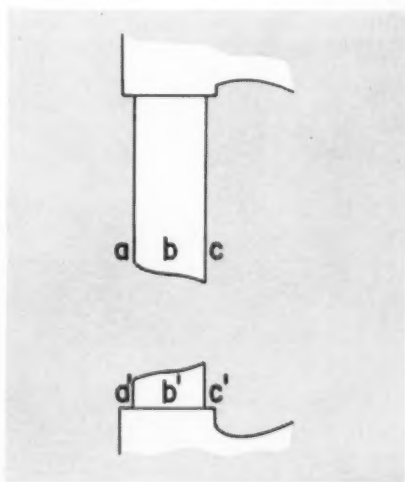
Anvils that have been worn out of parallel may be the reason why the micrometer's zero reading is "off." This sketch shows out-of-parallel condition exaggerated.
